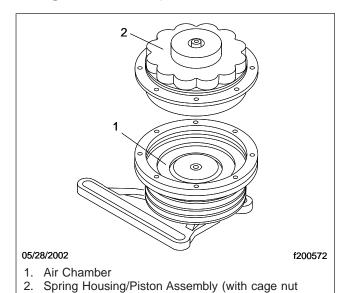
, Spring Housing/Piston Assembly Removal and Installation
